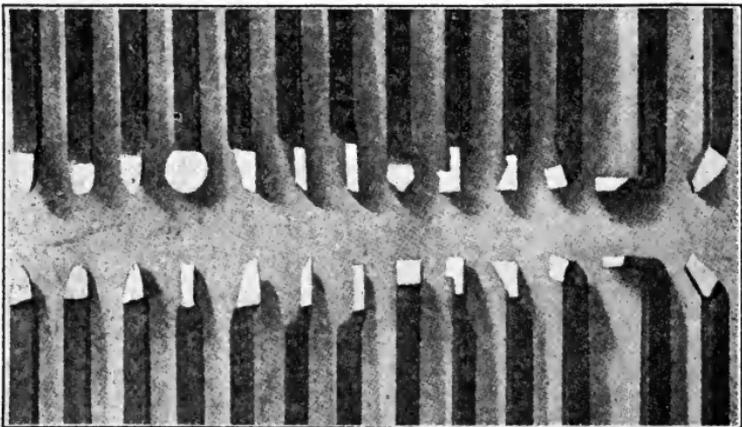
Set of Planer Tools Ground on Sellers' Tool-Grinding Machine
